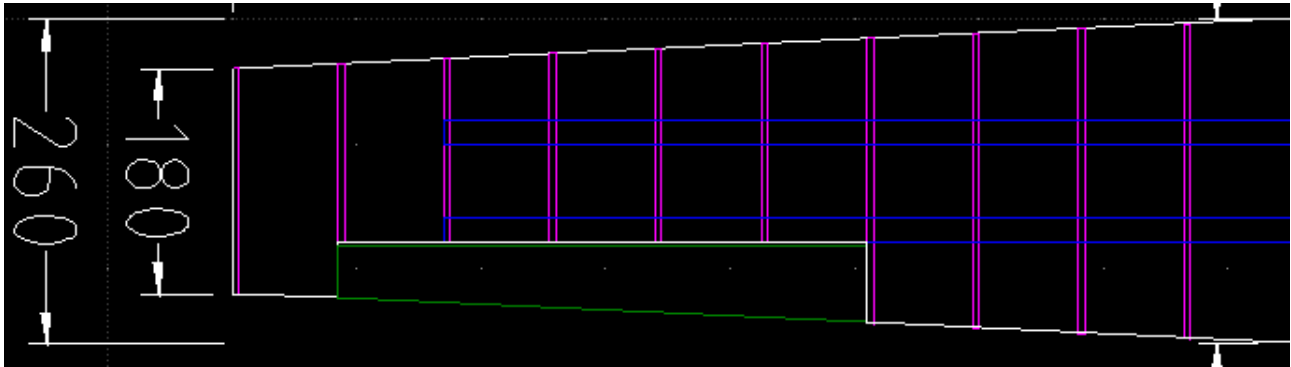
2-Dimensional CAD Drawing of Wing Structure
